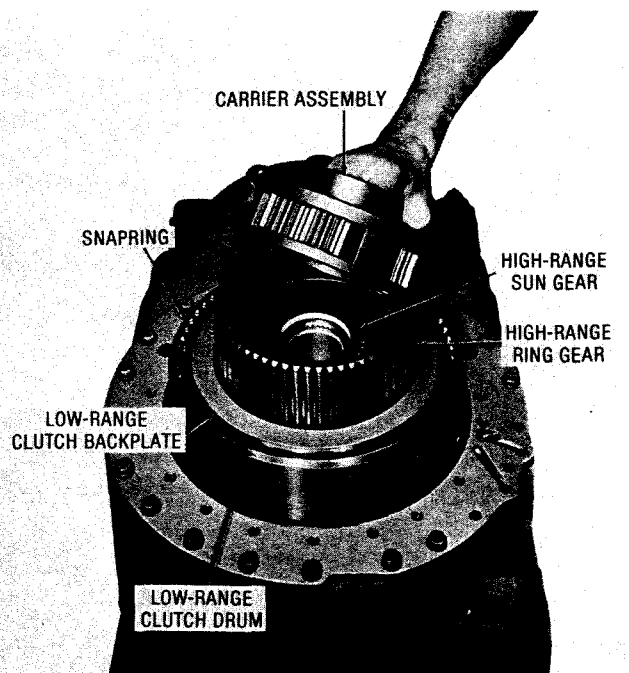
Removing high-range planetary carrier assembly (TRT 2221-1, 2421-1)
